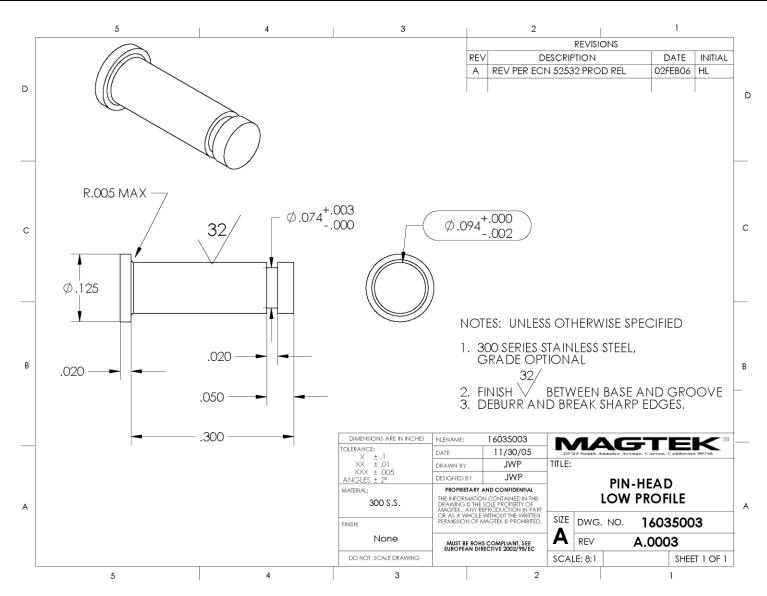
Head Pin (Used for Beam Style Head Mounting)
